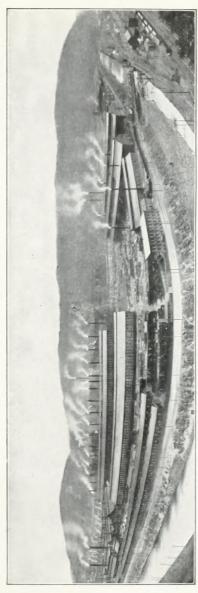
PLATE MILLS BAR MILL COLD ROLL SHOP 9" MILL
